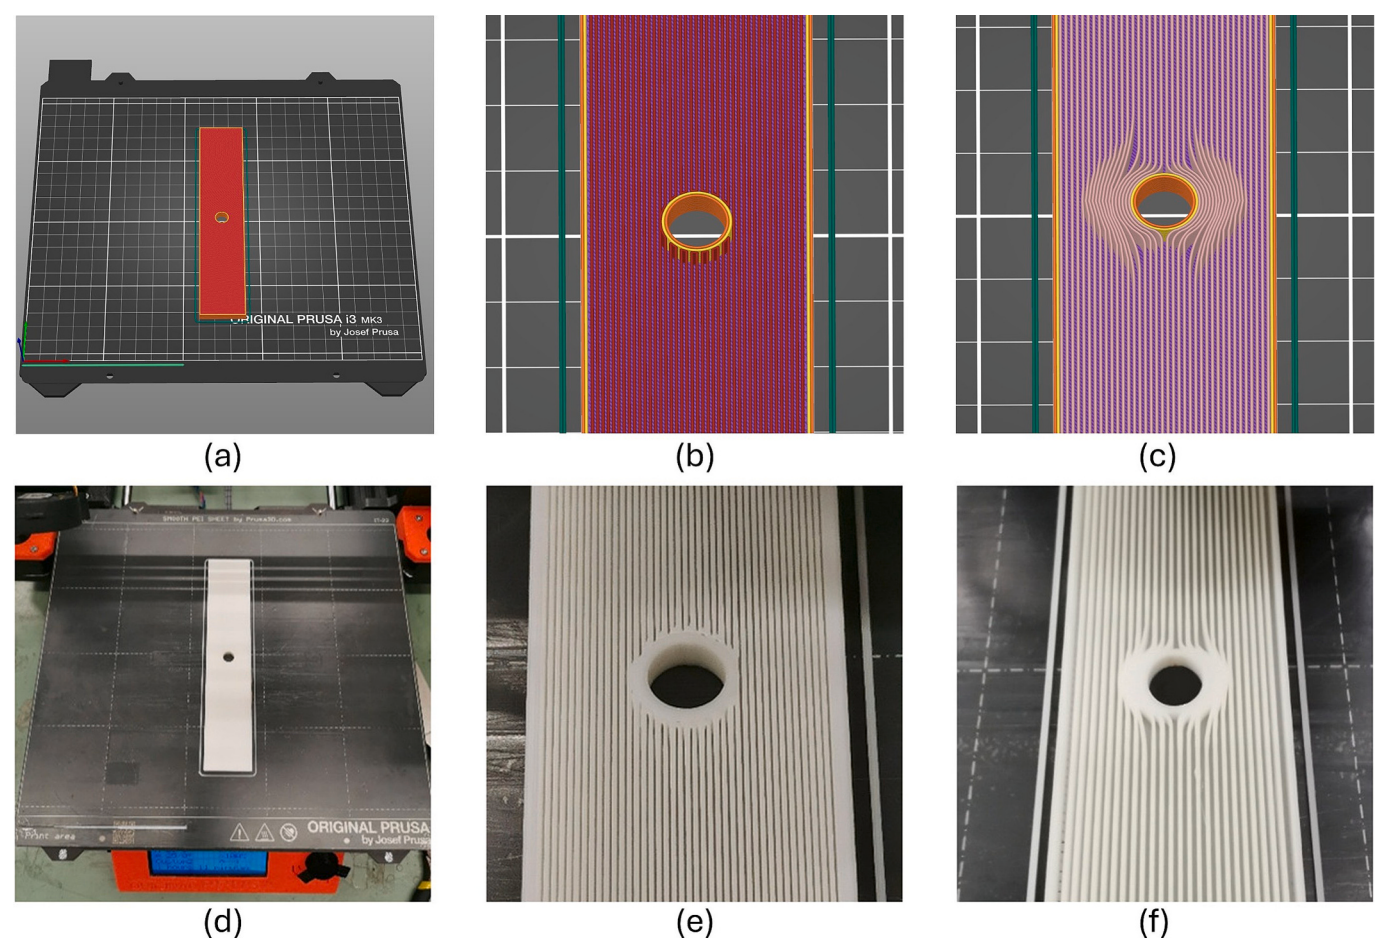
Tensile specimen with a 7.5 mm central circular hole and 60% infill density fabricated using a Prusa MK3S printer. The completed print and its placement on the build plate are shown in the slicer view (a) and on the printer (d). The printing sequence of the aligned rectilinear P1 specimen is shown in the slicer (b) and on the printer (e), while that of the adaptive A5 specimen is shown in the slicer (c) and on the printer (f).
